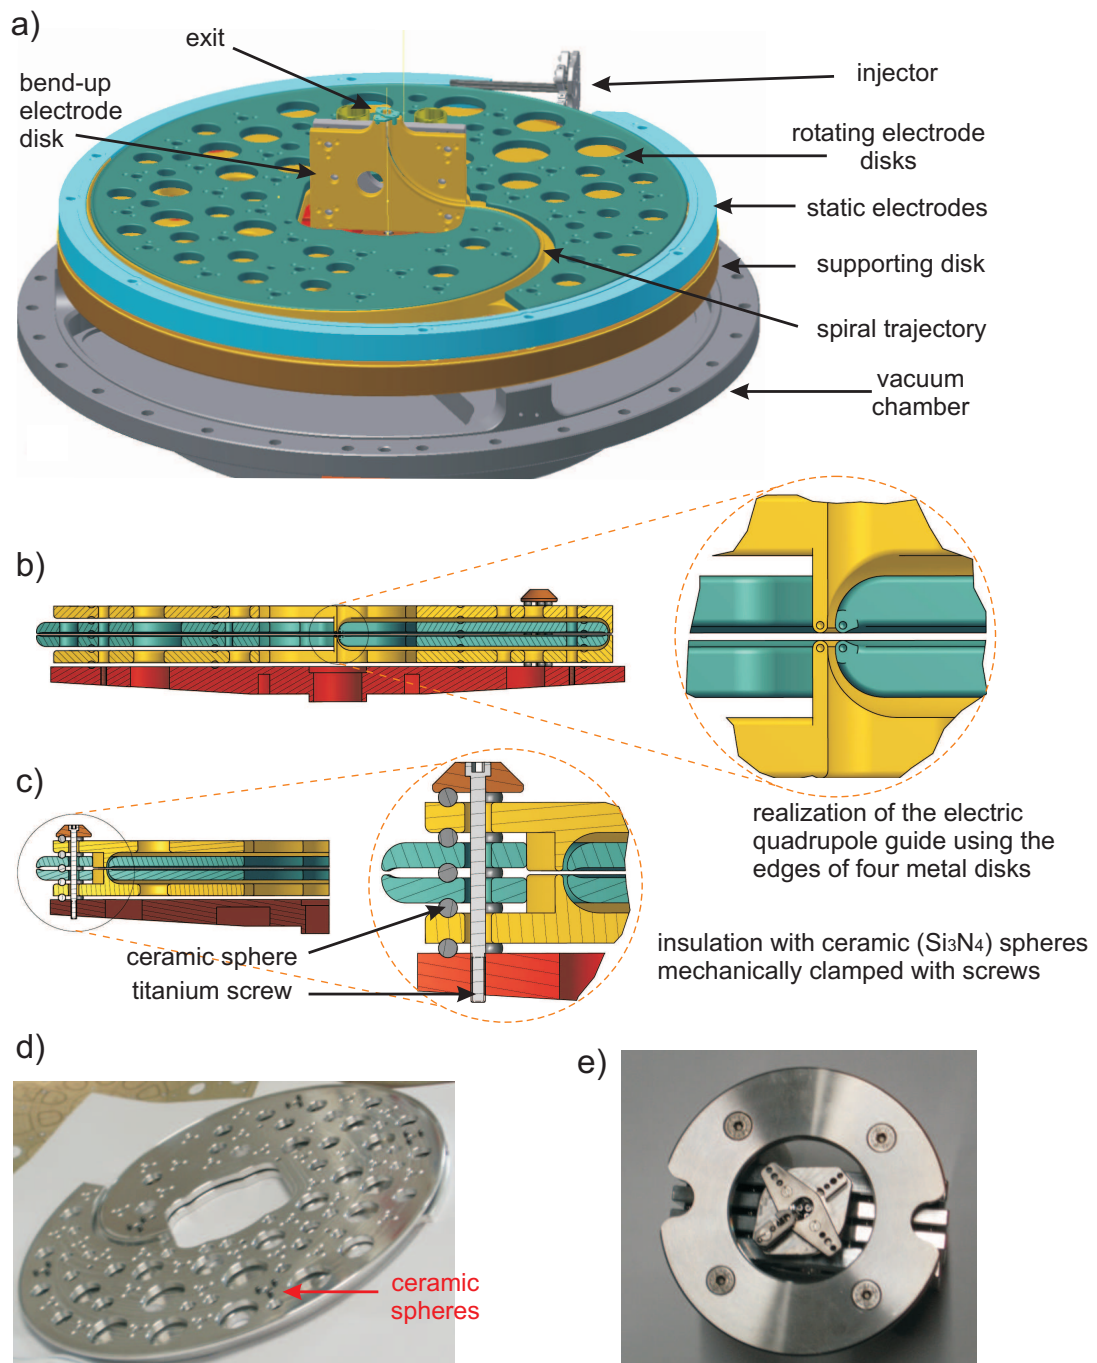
(a) 3D technical drawing of the centrifuge assembly. Two of the rotating disks are not shown deliberately to allow view of the spiral guide. (b) Cross section of the stacked metal disks with a zoom-in of their carved edges. (c) Cross-section of half of the stacked disks showing the ceramic-sphere isolation with a zoom-in of the structure. (d) Photo of the in-plane rotating electrode disk, with some ceramic spheres placed in dimples on the top surface of the disk. (e) Photo of the assembled exit-bend plates (topview).
